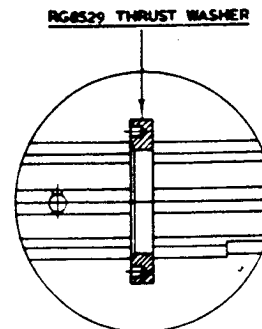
SECTION THROUGH THRUST WASHER IN POSITION ON SHAFT.
